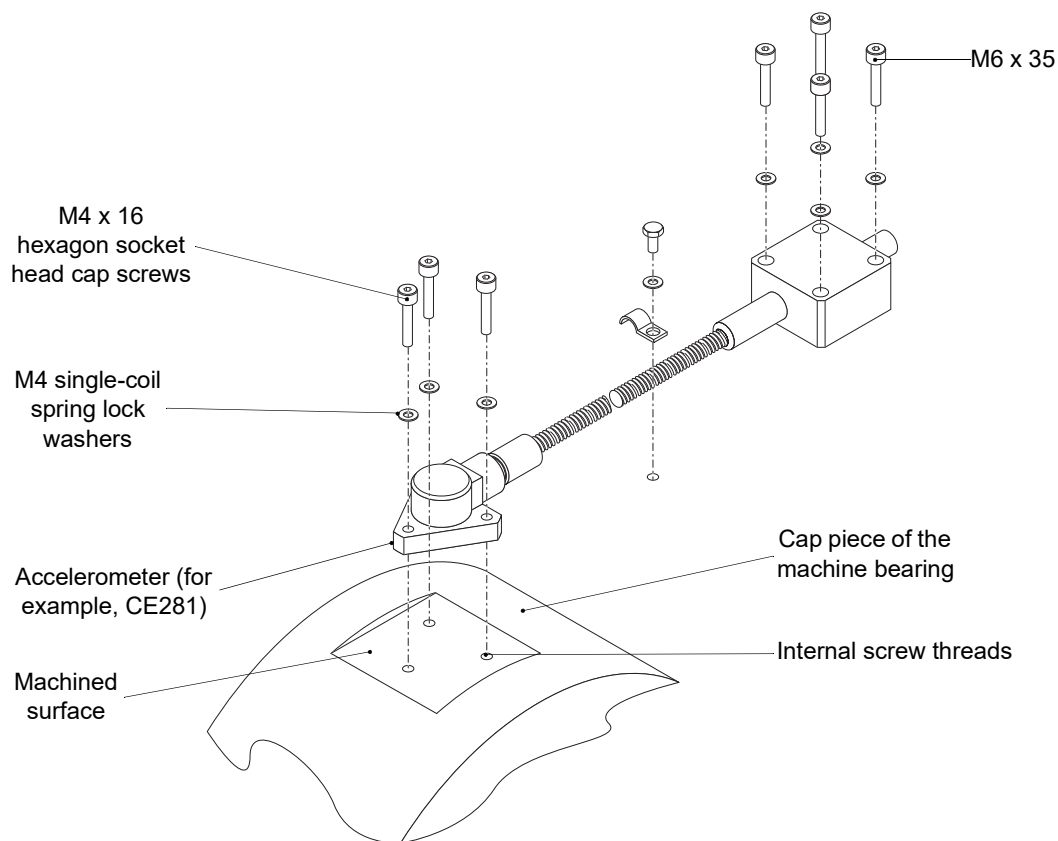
Mounting CExxx piezoelectric accelerometers on a machined surface
